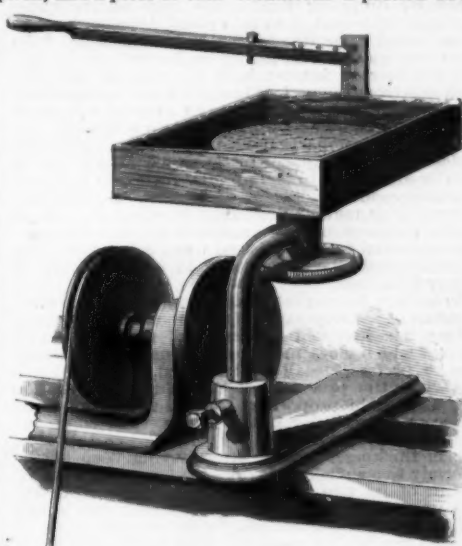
LENS GRINDING ATTACHMENT FOR FOOT LATHE.
